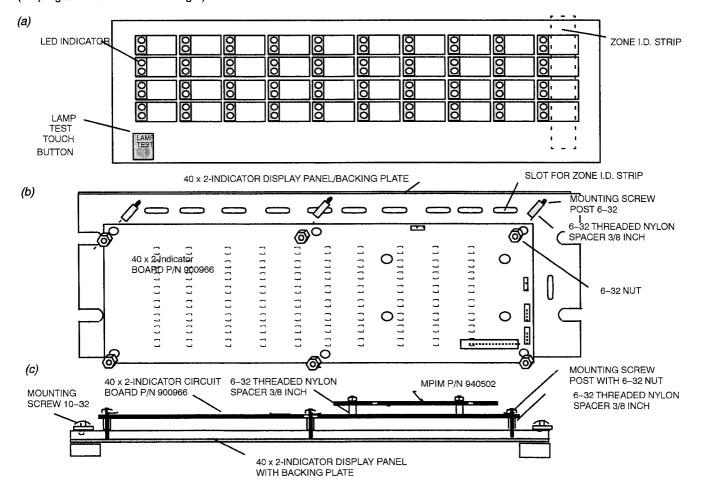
40 X 2-Indicator Module. (a) Front view, (b) Back view, (c) Side view.
